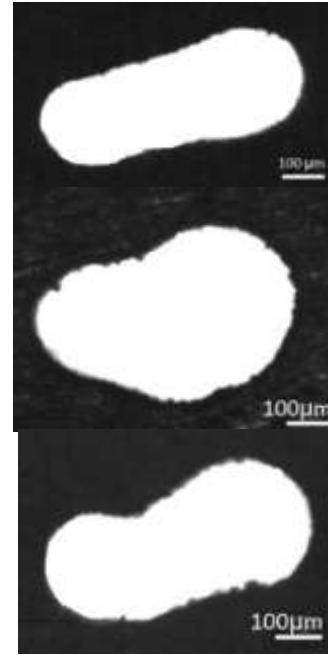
Elliptical holes that might be produced by drilling using bent electrode
